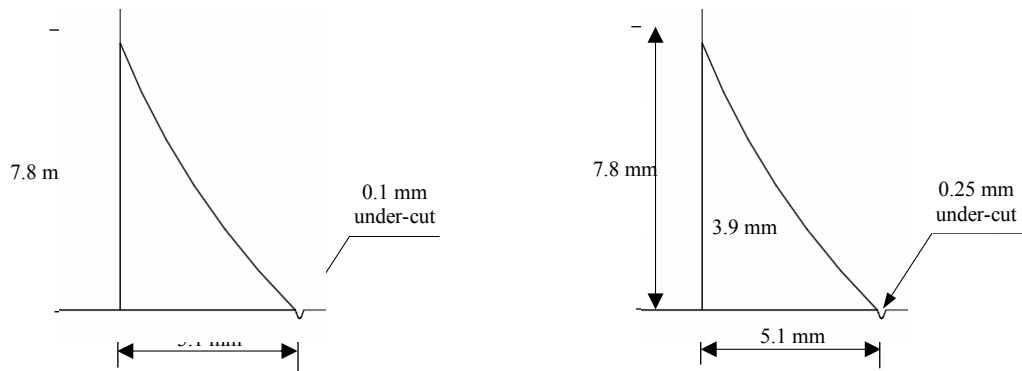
Case 2 weld dimensions used in finite element model for nominal fillet weld 6.4 mm.
